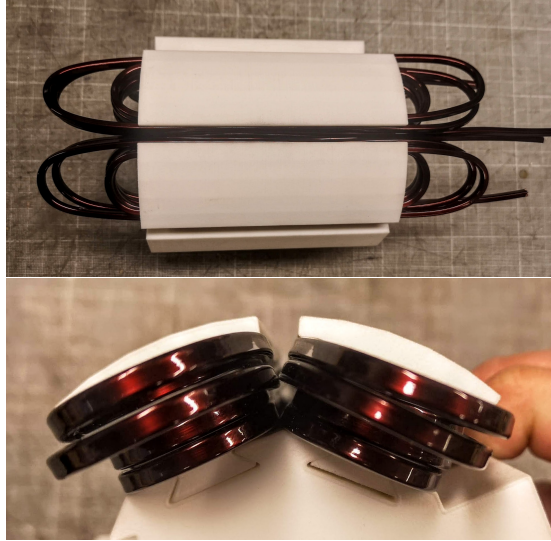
Photos of windings on teeth on rotor, completed for 2 poles.
